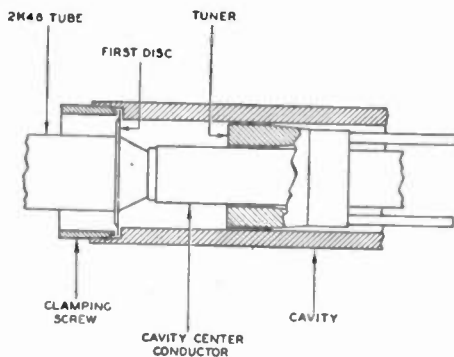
Cross-section of coaxial cavity with wide tuning range, showing the method of clamping the tube.
